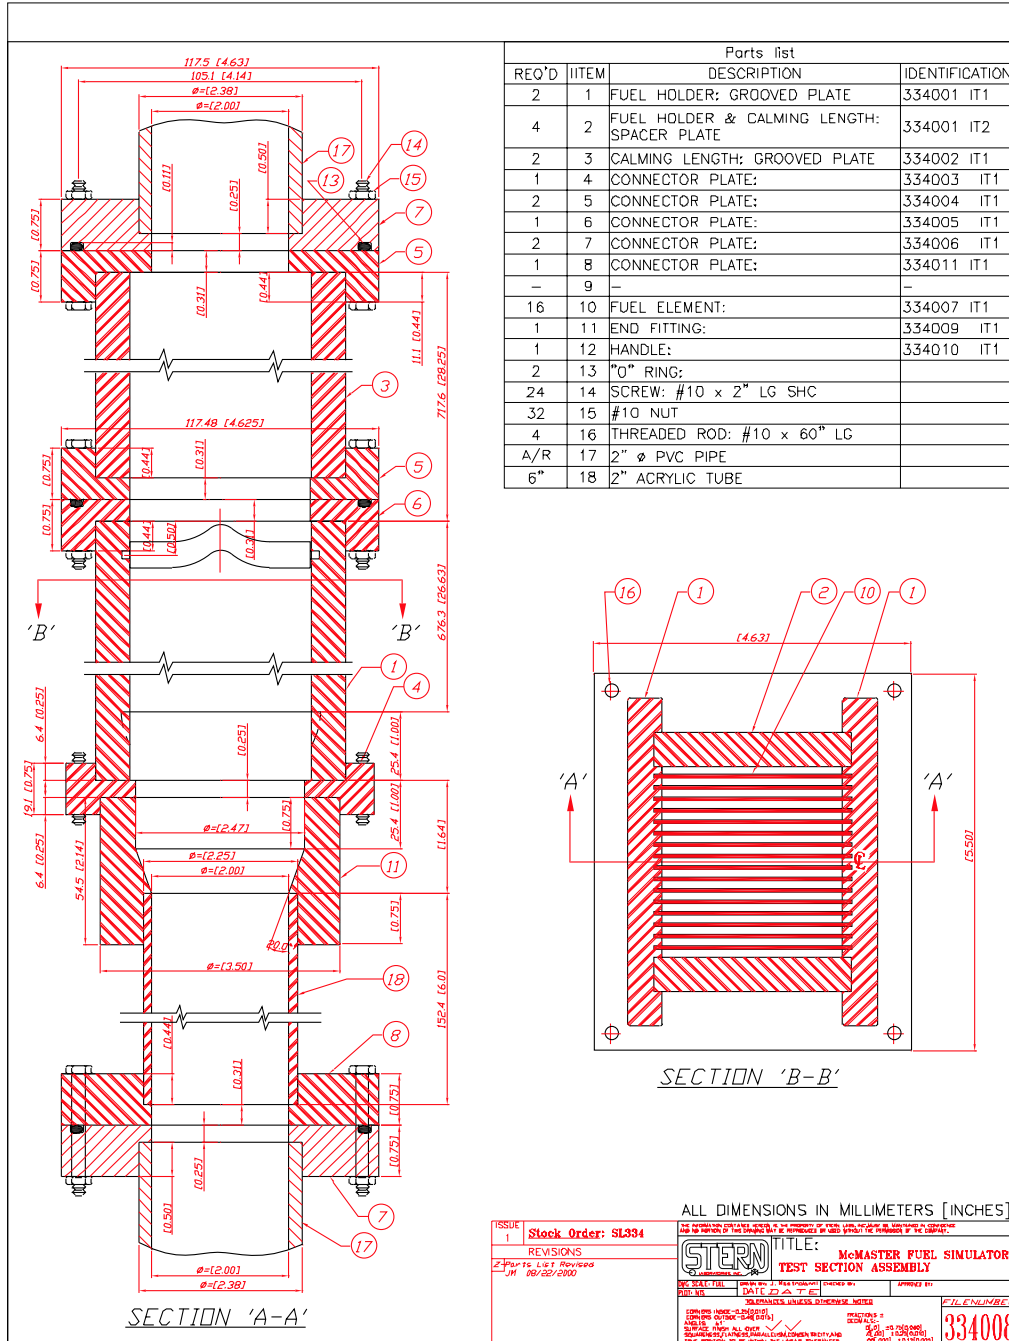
Schematic of the 18-plate fuel assembly from axial side view
